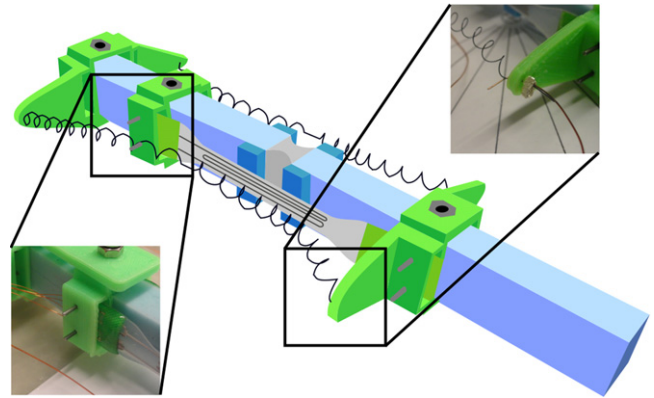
An assembled robotic joint with a non-homogenous beam. The mounting brackets are placed over the beam and locked in place with pins. The elastomer struts are visible on either side of the joint. The pins also lock in the sensors on either side of the beam (seen in the lower left inset) and the SMA is crimped through the holes on the mounting brackets (seen in the upper right inset).
